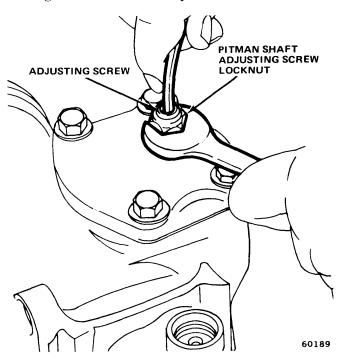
Removing—Installing Adjuster Screw Locknut
